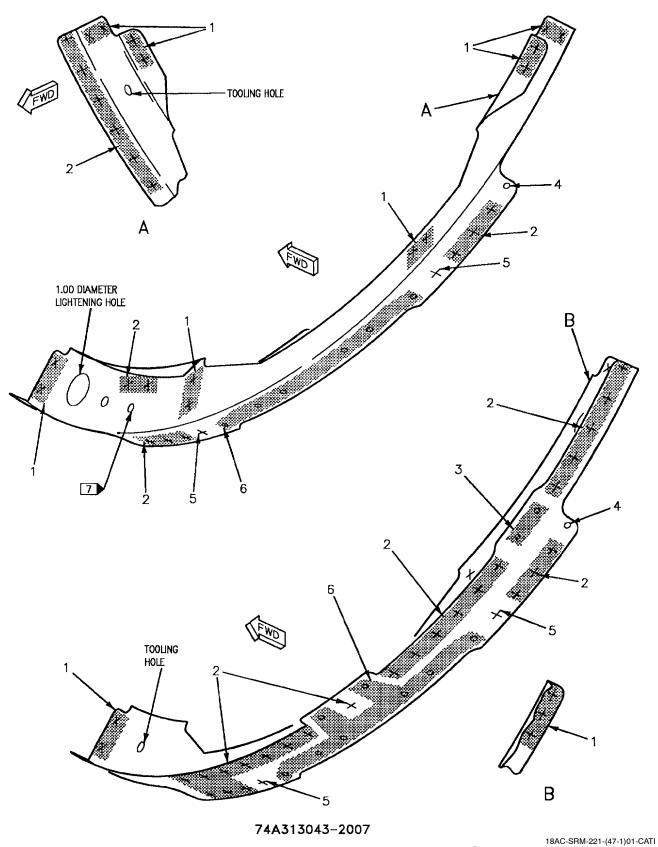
Former, 74A313043, Fastener Index (Sheet 1)
